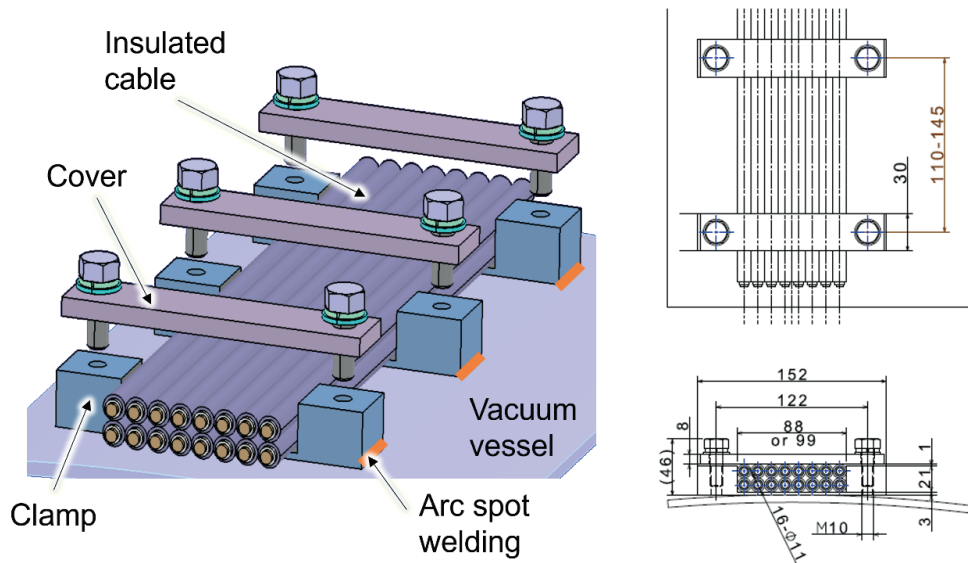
Cross section of the TFC. A conductor with no cooling channel coated by insulator is clamped to the bobbin on the vacuum vessel. The SUS bobbins are fixed on the vacuum vessel by the arc spot welding. Winding structure is two solenoids.
